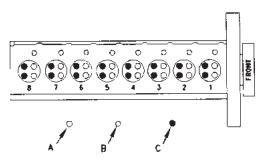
G3608 Engine Design (A) Inlet. (B) Gas admission. (C) Exhaust.
